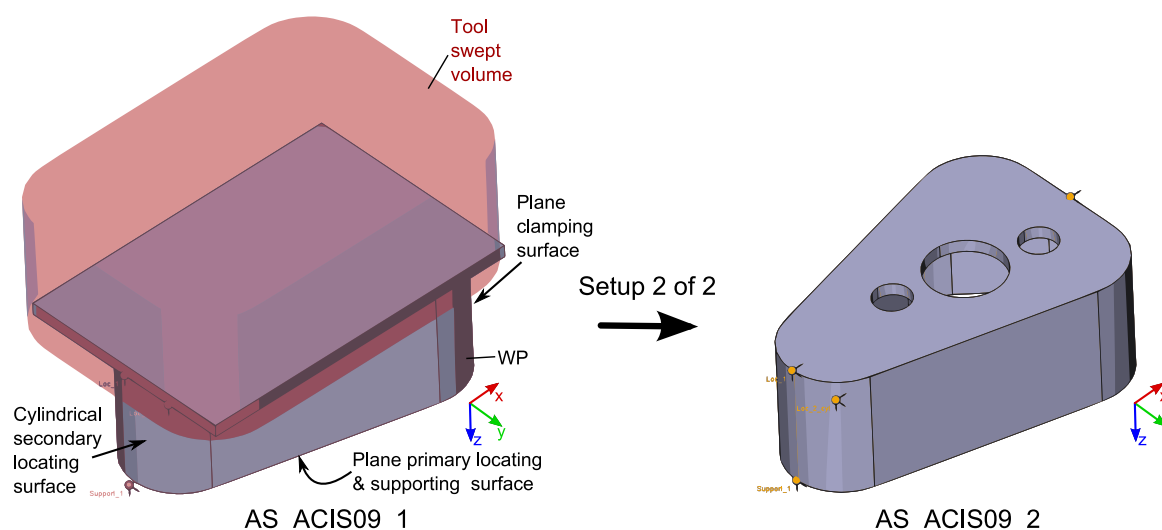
Setup 2 of 2 of workpiece AS_ACIS09 with cylindrical locating and plane clamping surface
